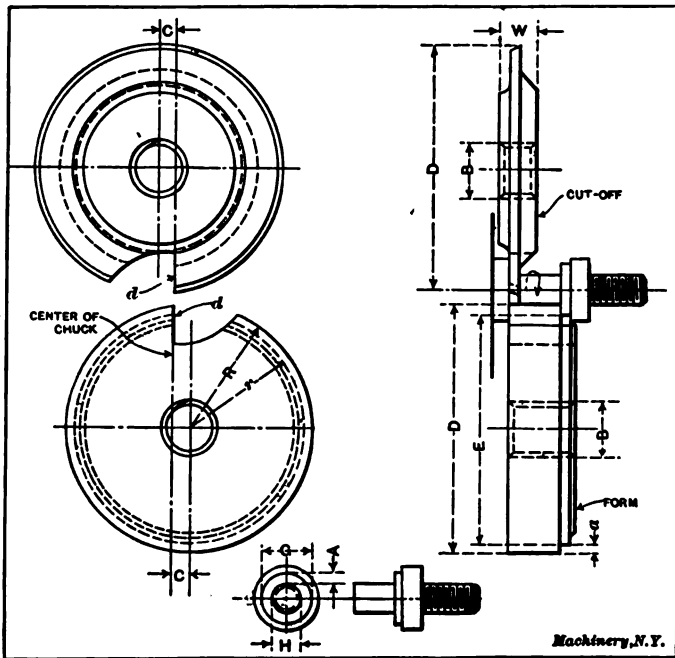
Diagram showing Principal Dimensions of Circular Form Tools
